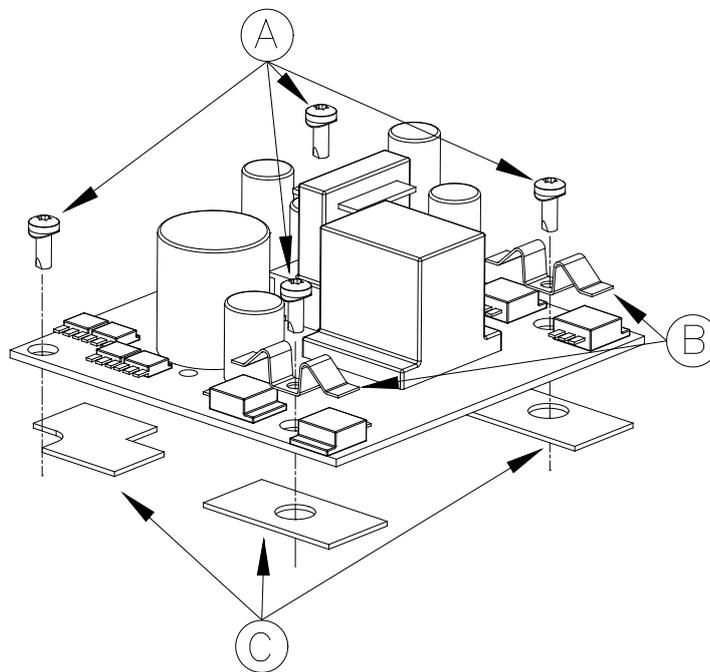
AC6310 mounting screws (A), fixing springs (B), and silicon elastomers (C)
